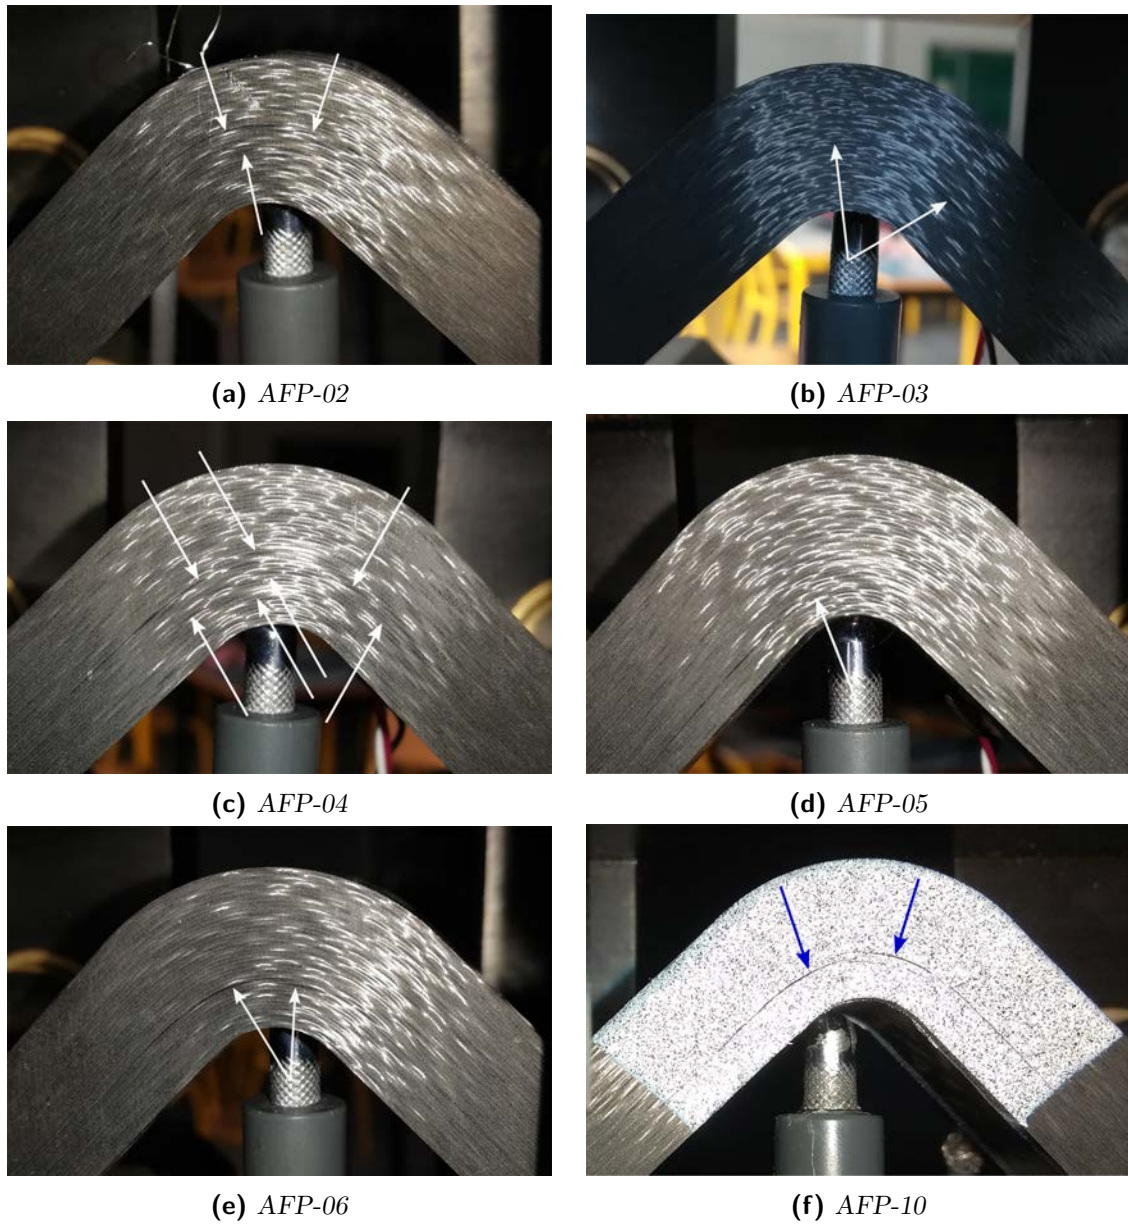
Photos of AFP L-beam specimens after test completion. White arrows show crack locations. First failure crack locations, identified by DIC, are marked by blue arrows.
